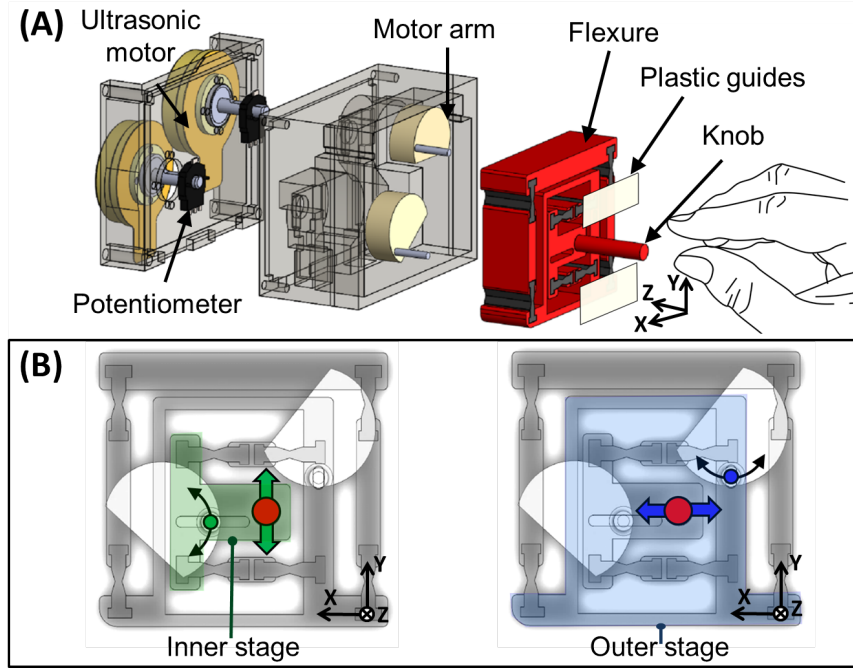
(A) Exploded view of the haptic device shows the arrangement of the ultrasonic motors, motor arms and flexure mechanism that enables Cartesian position control of the knob. (B) shows independent stages that two motors actuate with pins in slots to achieve position control in the x and y directions.
